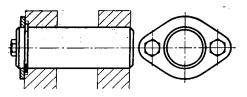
Pivot pin fixed against axial displacement by bolted end plate and retaining ring
